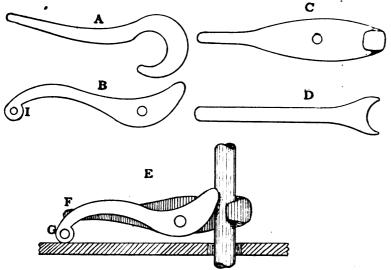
SHOWING PARTS OF PIPE-HOLDING JACK AND METHOD OF USING.
